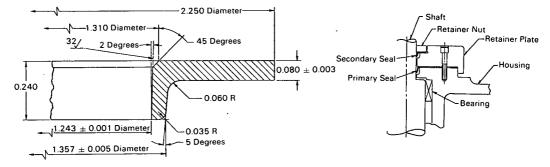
Cross Section of a Seal (dimensions are in inches)
